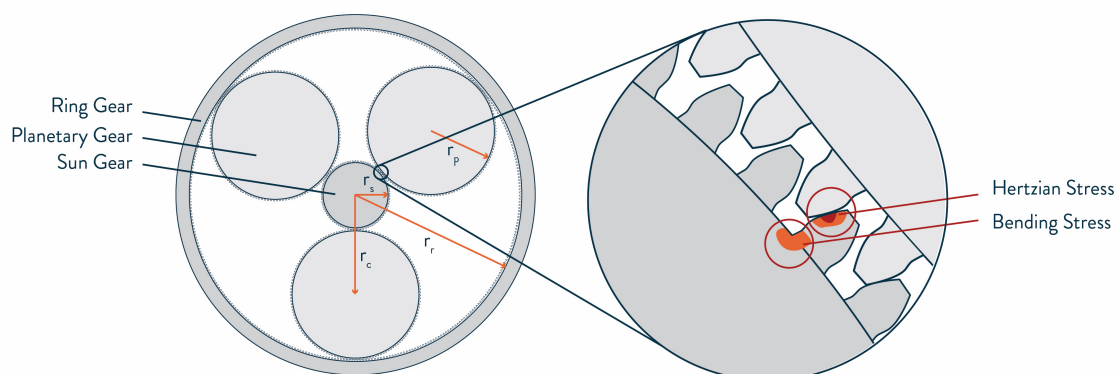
Gearbox cross-section highlighting the most important components and limiting mechanisms
